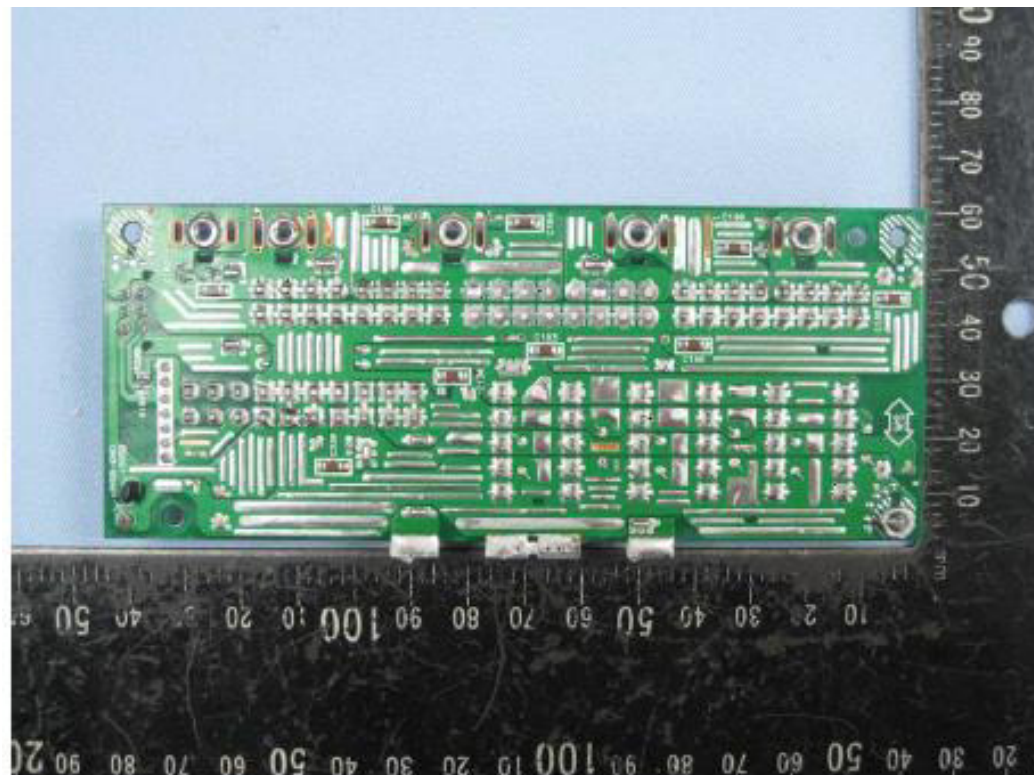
PCB type DC-4974 (GPS-1000DB XX)
